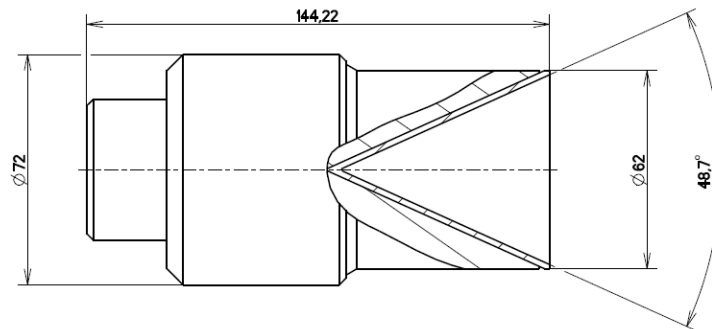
French Reference Shaped Charge CCEB 62 Drawing
